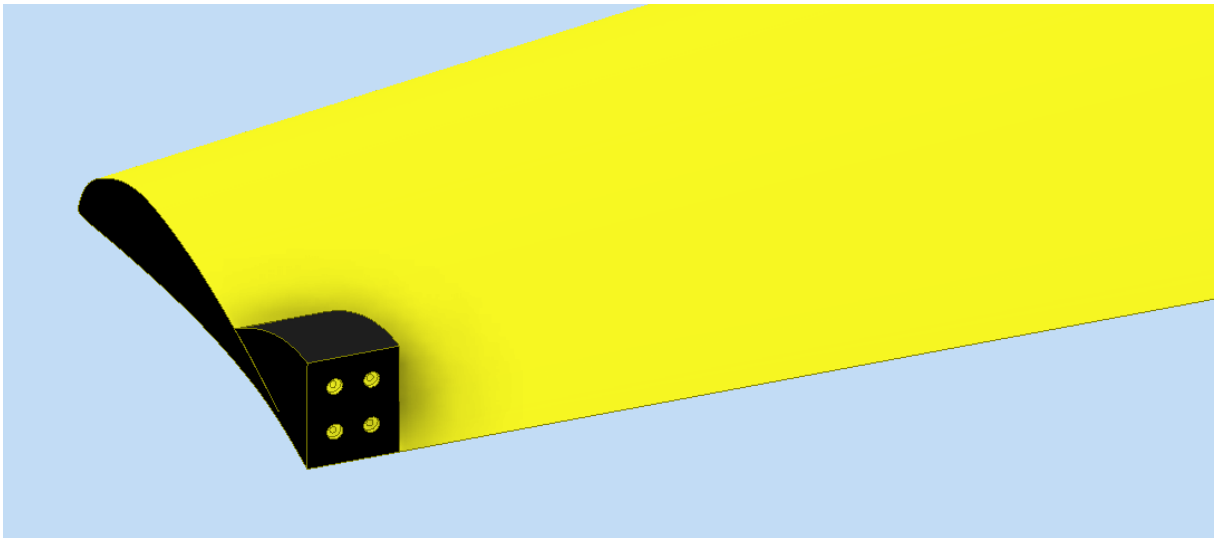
showing the Engine Mounts on the wingtip without the engine
